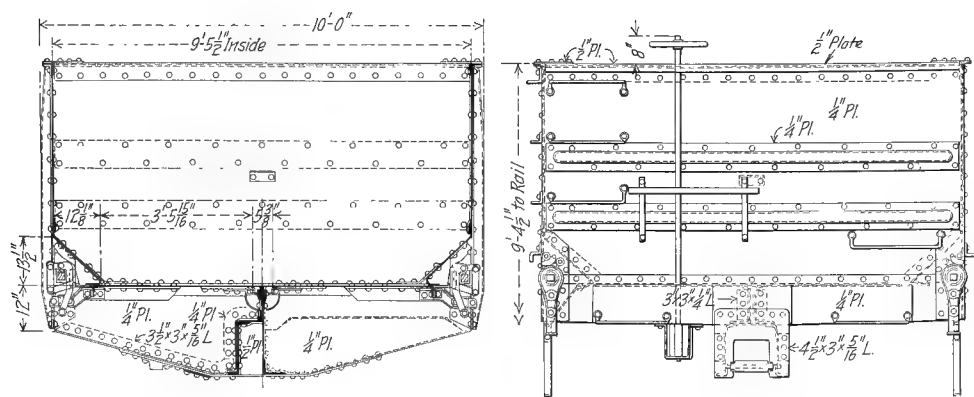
Cross Sections and End Elevation of All-Steel Drop Bottom Gondola Car Shown in Fig. 335.
